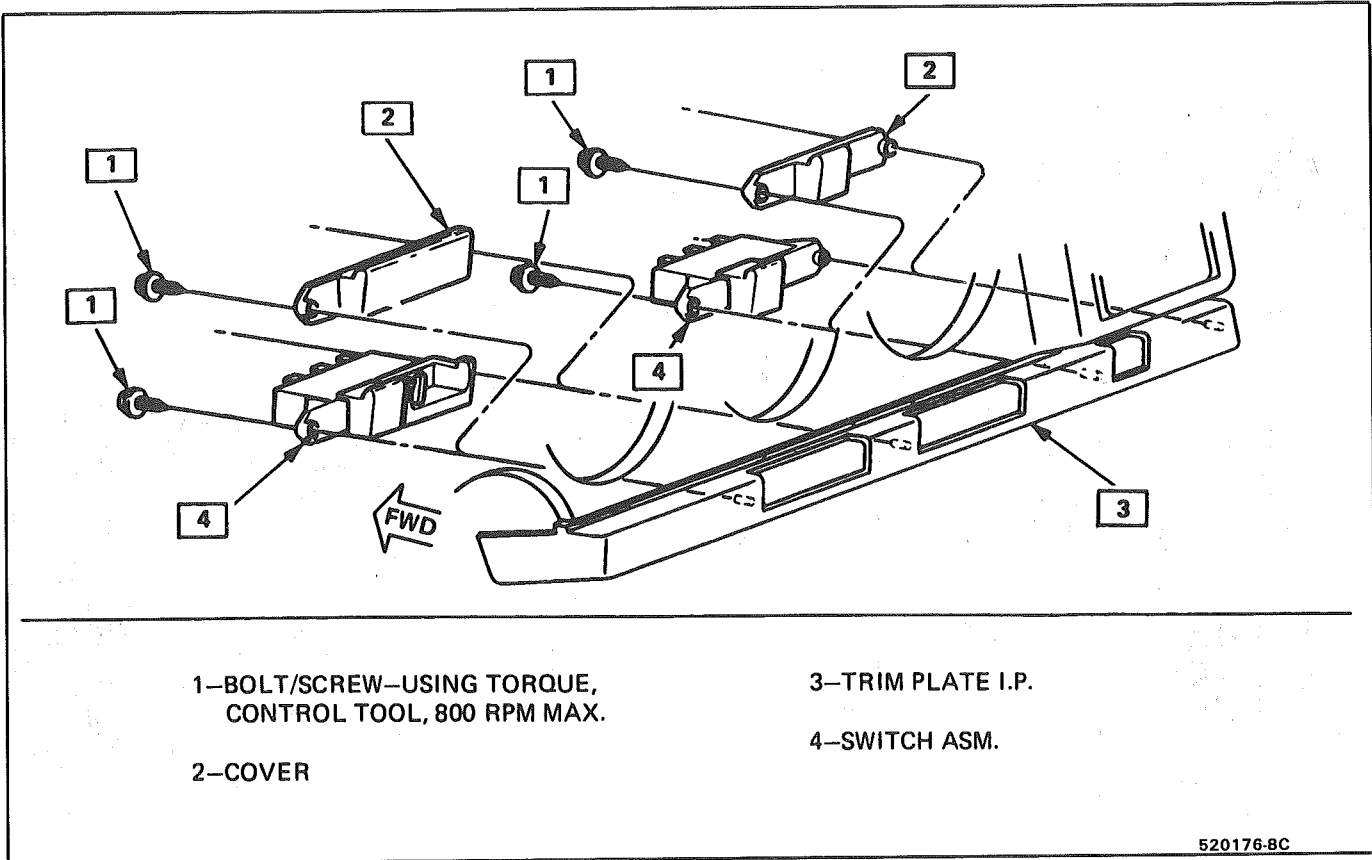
Subwoofer & Hatch Release Switches/Covers
